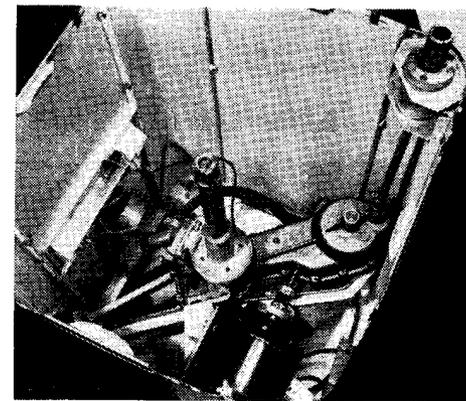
With tub removed access is available to the motor, the wringer drive shaft and drive socket
